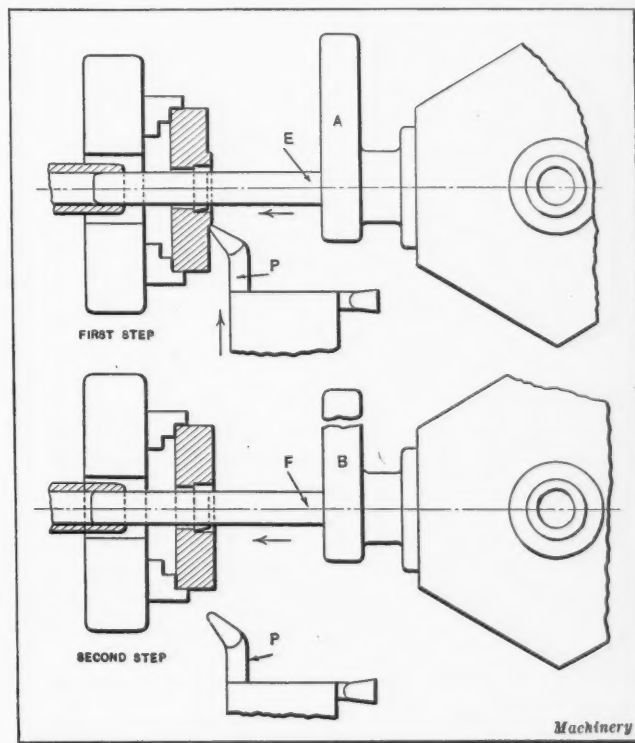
Rough- and finish-boring the Hole of Part *B*, Fig. 1, and facing One Side
